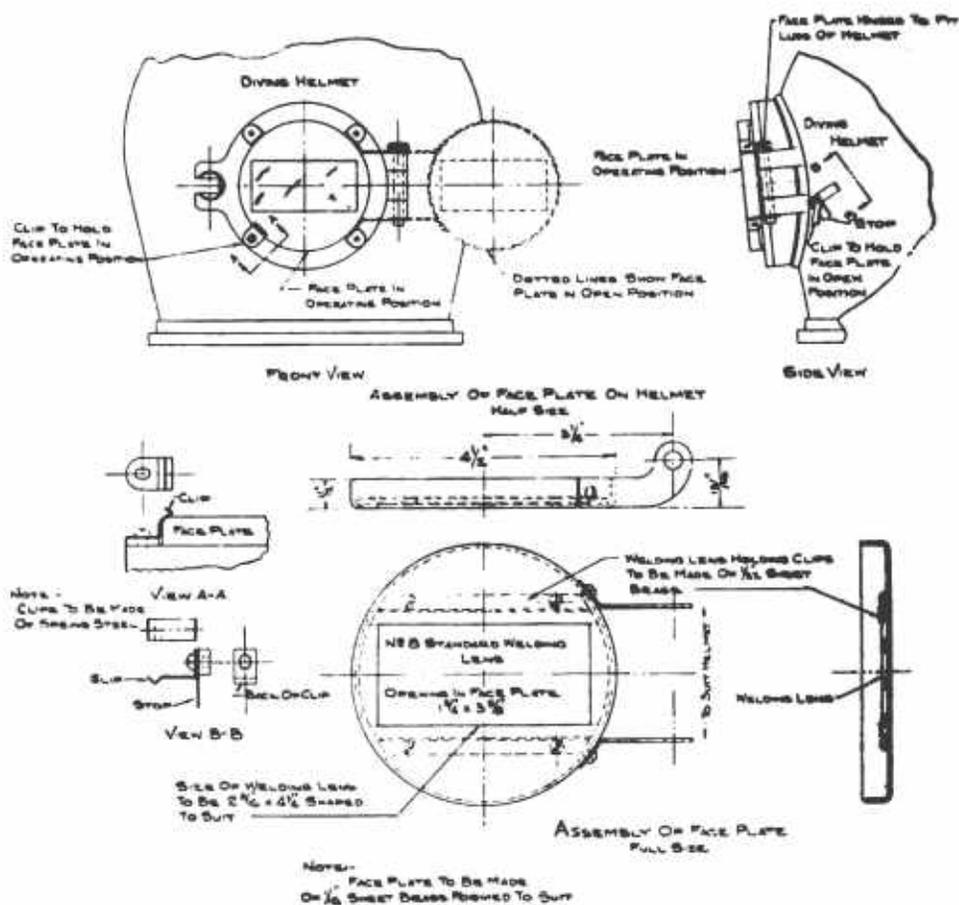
A.—Welding lens and frame, helmet.
